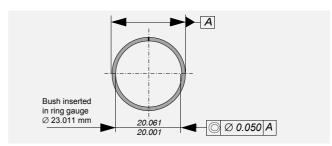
Test C, Data for drawing (example  $D_i = 20 \text{ mm}$ )
